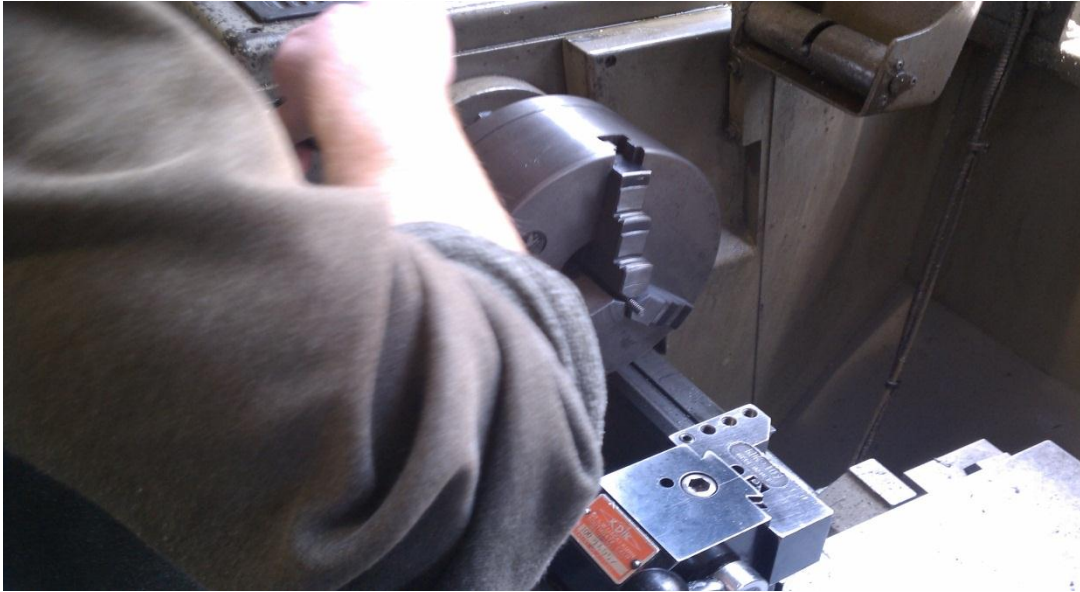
Lead Screw Being Fixed into Chuck of a Lathe
